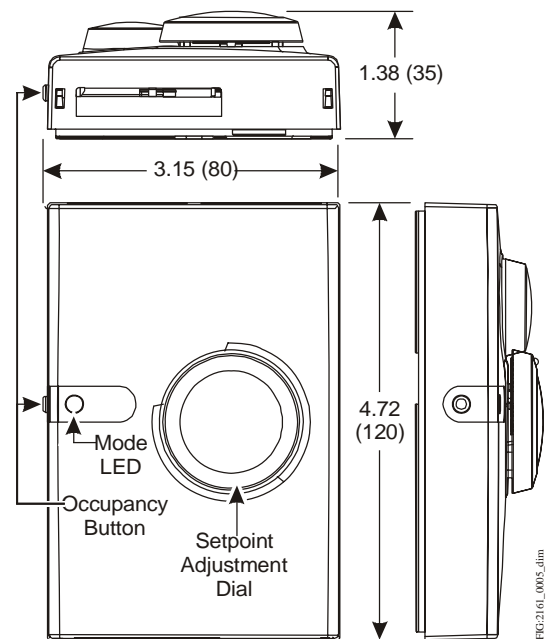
TM-1161-0000 and TM-1161-0005 Dimensions, in. (mm)
